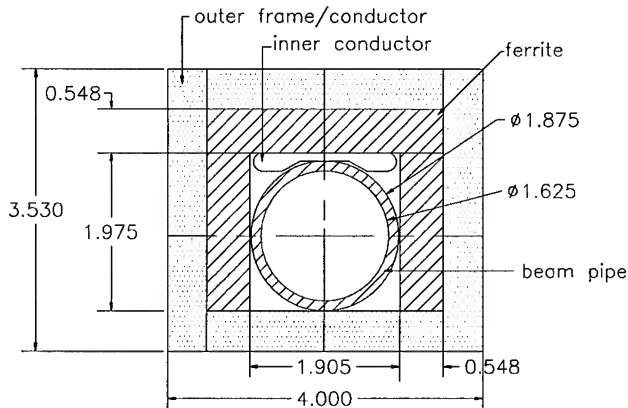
RHIC injection kicker cross section, Dimensions in inches
